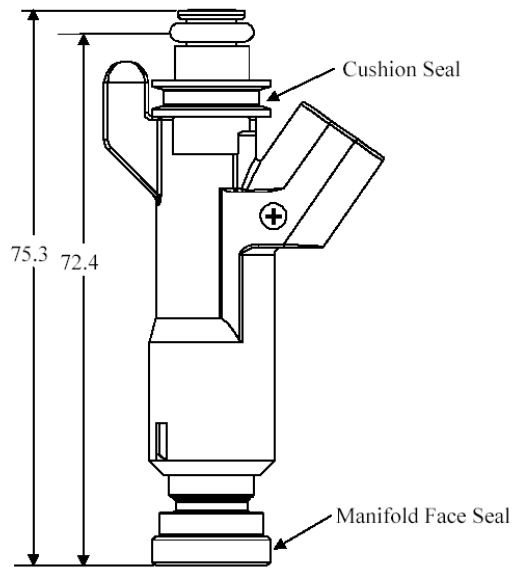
Multec 3.5 Fuel Injector Dimensions – Cushion seal / Face seal design (For exact dimensions, refer to Delphi Injector Outline Drawing).
